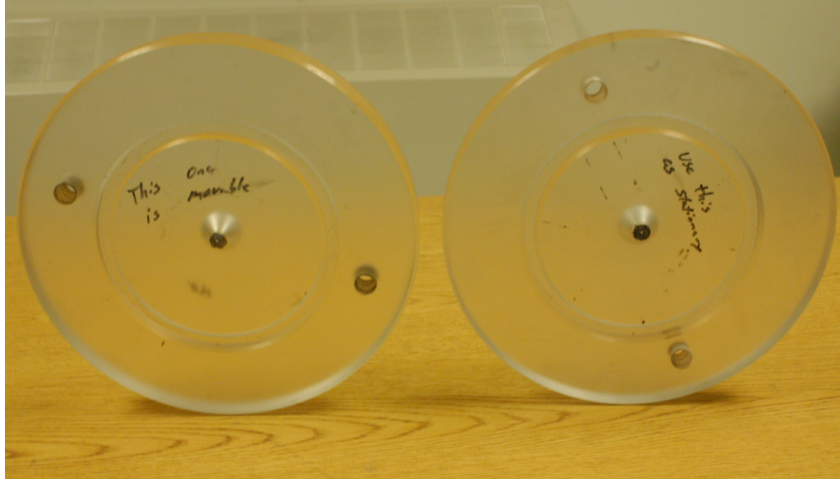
Circular Alignment Plates used for Alignment of Axisymmetric Pieces
